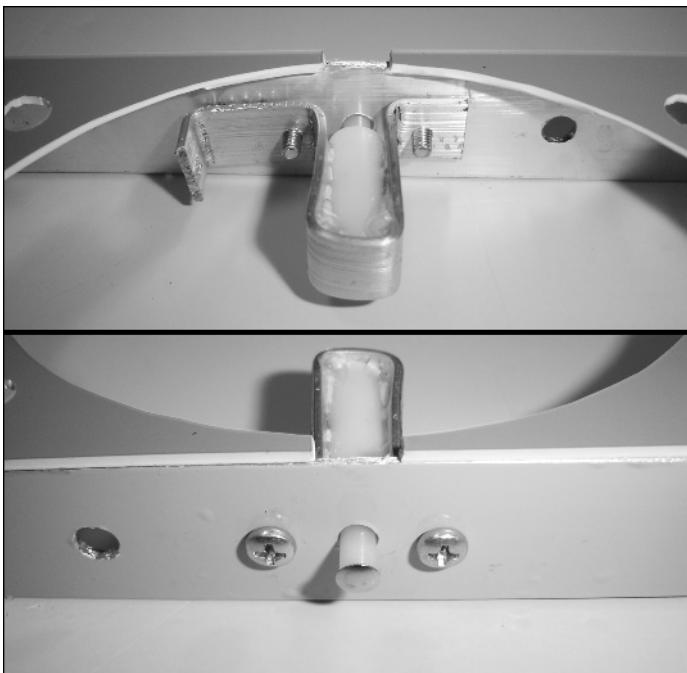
The latch assembly installed in the case, front and rear.
